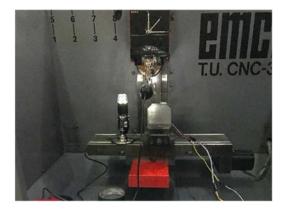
(a) Display of workpiece position, cutting tool, ADXL 345 sensor, and digital microscope
